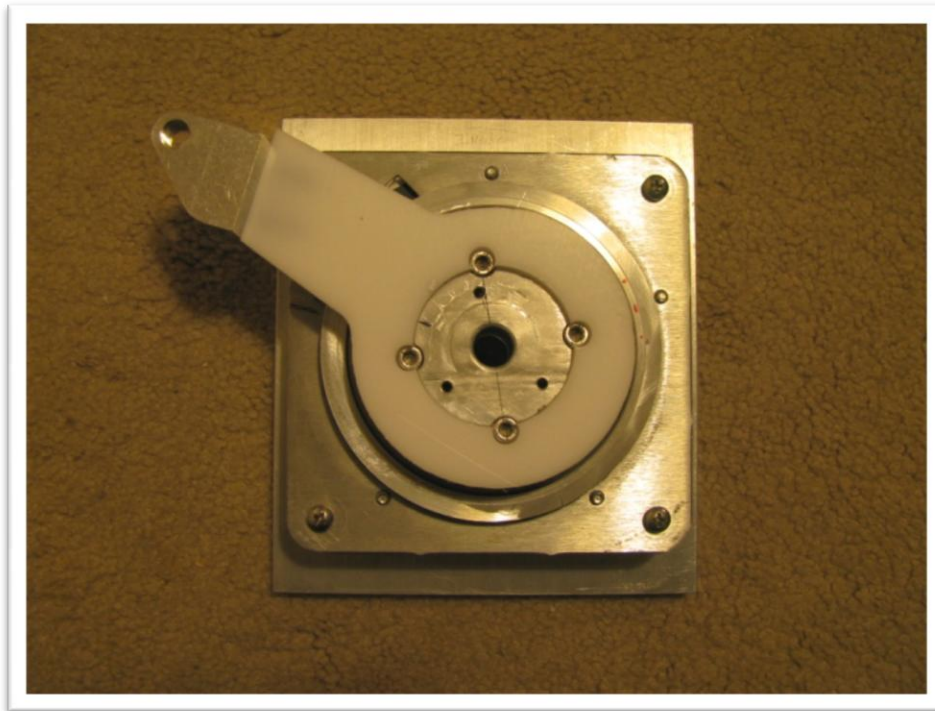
Shoulder lever mounted to shoulder bearing - Photo by: Blake Mann
